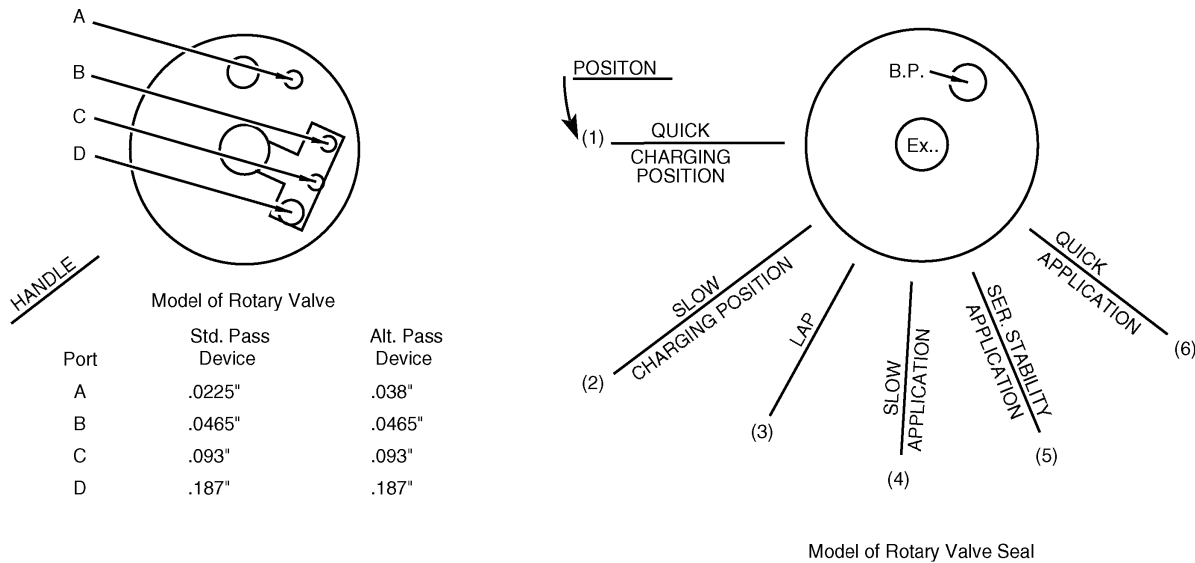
Rotary Valve and the Rotary Valve Seat of the Single Car Testing Device
